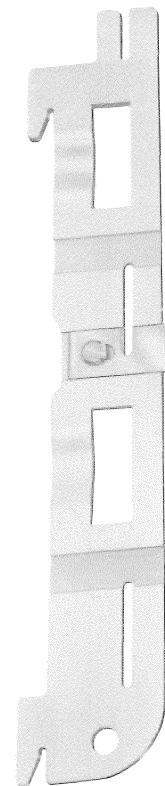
KS-20950, List 1 Cover Parking Tool
